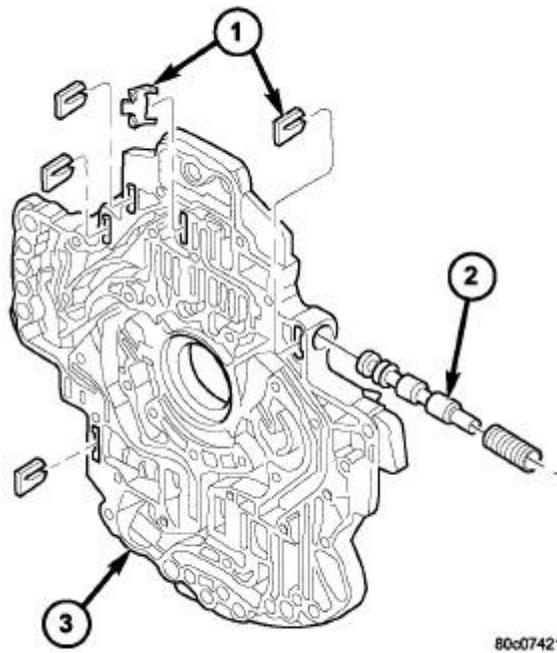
Oil Pump Valve Retainers & T/C Switch Valve
